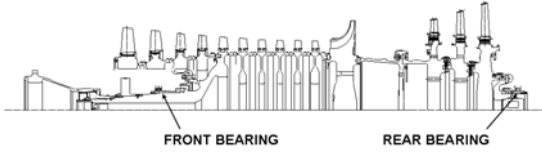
Cross section schematic of 5 MW gas turbine rotor
